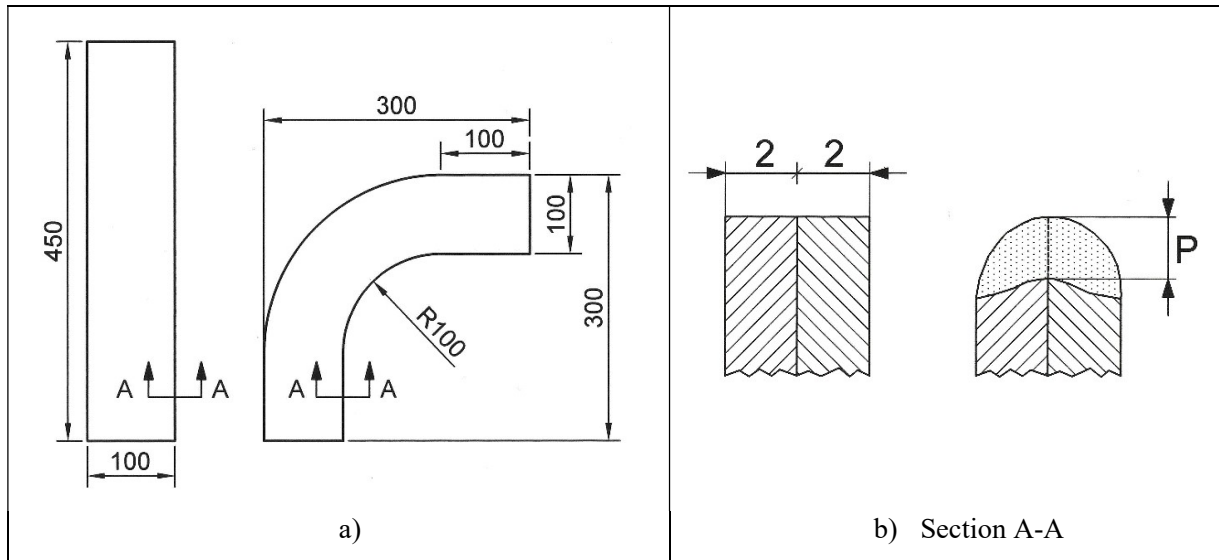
a) Geometries and main dimensions of test specimens fabricated from 2 mm thick AISI 316L sheets. b) Section A-A from fig. a) showing edge joint configuration used and a schematic of principle how joint penetration (marked with P in fig. b) is determined from the cross-section of welded joint. Dimensions are in millimeters.
